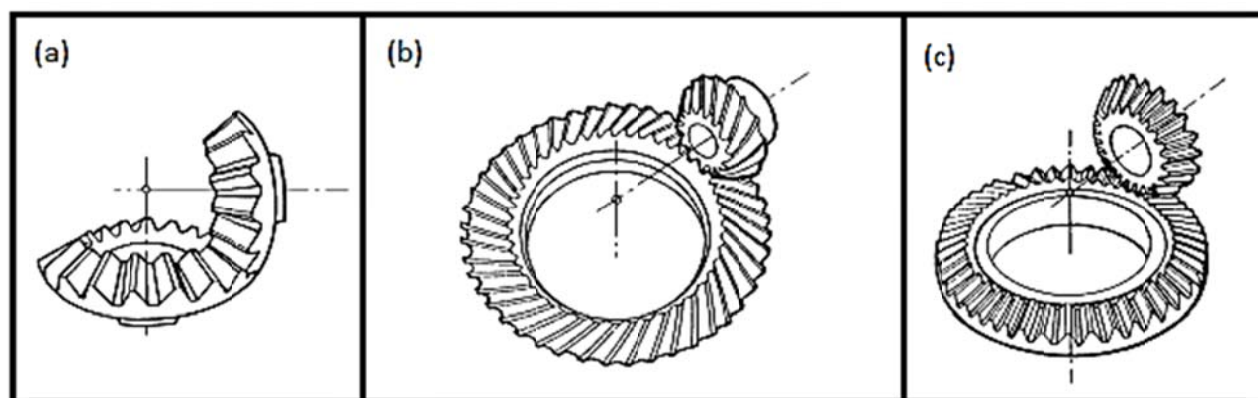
Intersecting Axes Gears, (a) Straight Bevel Gear; (b) Spiral Bevel Gear; (c) Zerol Gear
